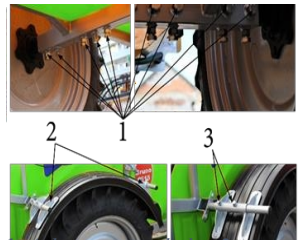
1. Axle mounting bolts. 2. Mudguard mounting brackets. 3. Mudguard mounting bolts
